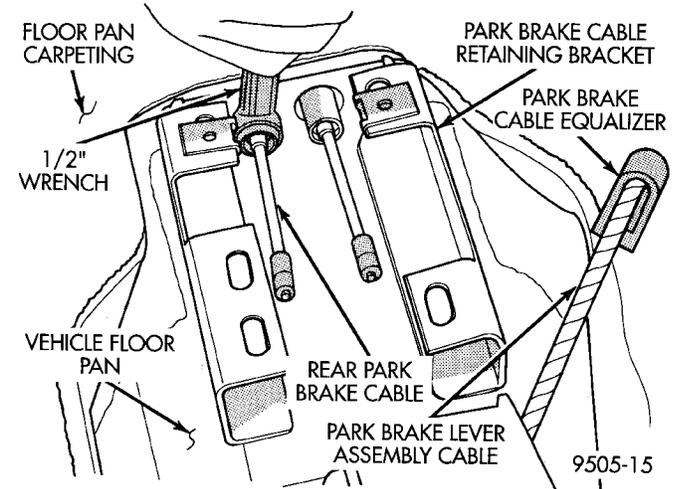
Compressing Park Brake Cable Retaining Tabs
